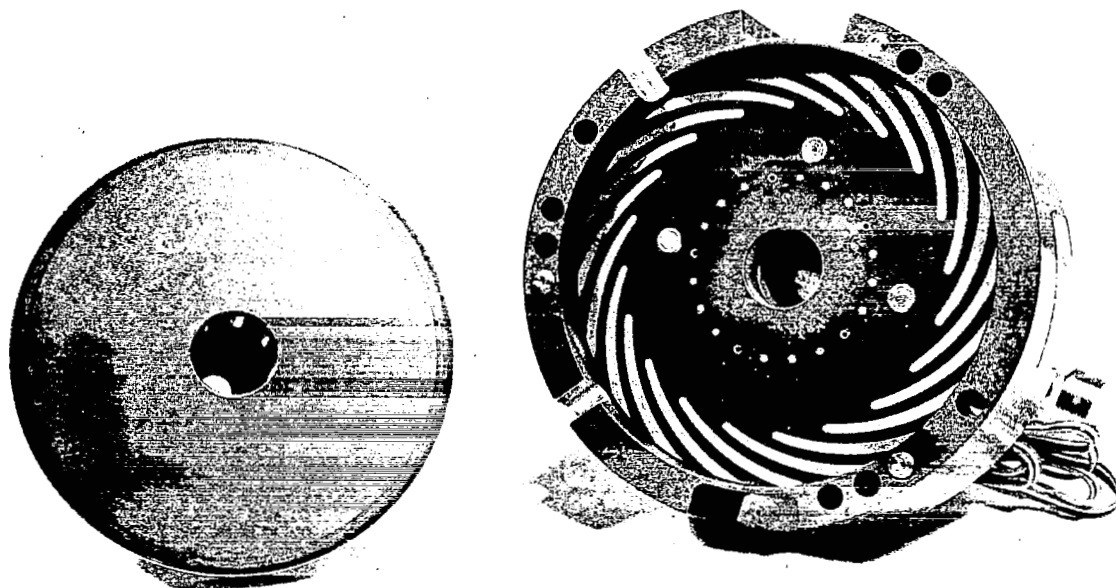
Forward Thrust Plate and Runner, Inspection 1, After Cleaning
